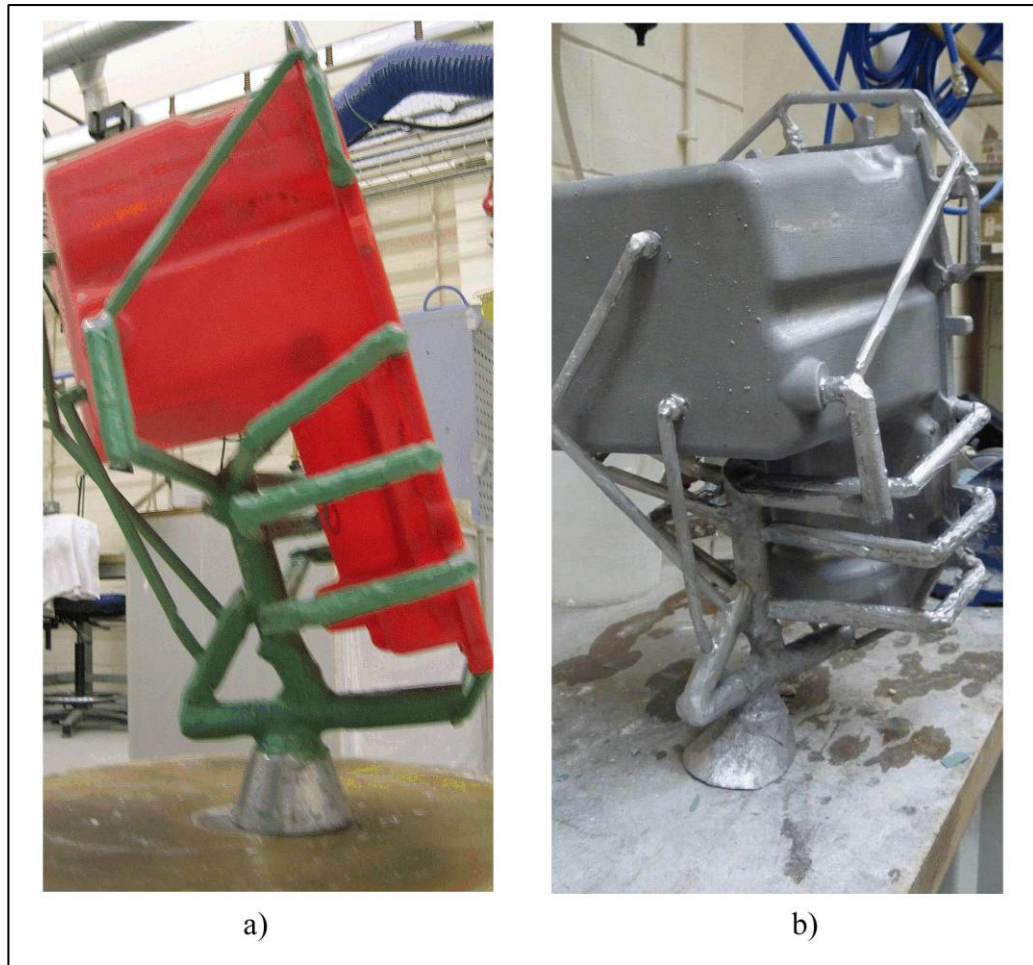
a) Casting tree with infiltrated Castform pattern; b) final metal casting
